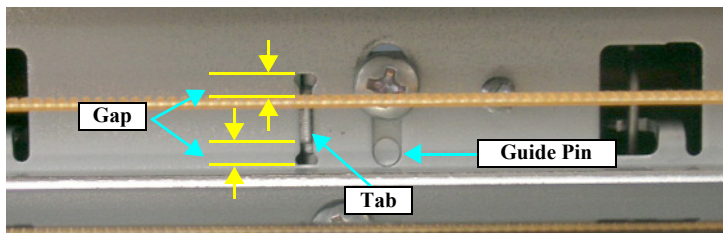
Checking the Position of Tab on the Guide Roller LD
